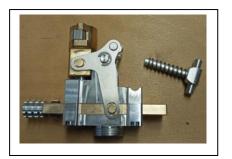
Once the spring and the spring guide have been removed, proceed to remove the circlip ring that holds the lever system assembled.
